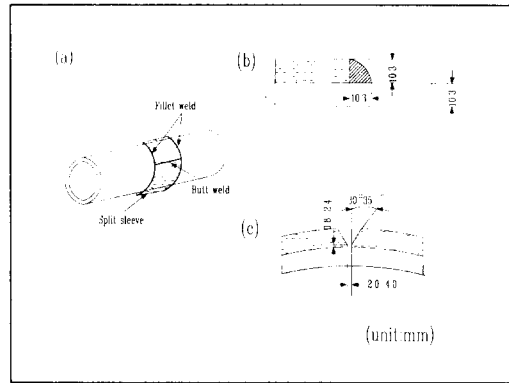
Schematic drawing of pipeline welding using sleeve
